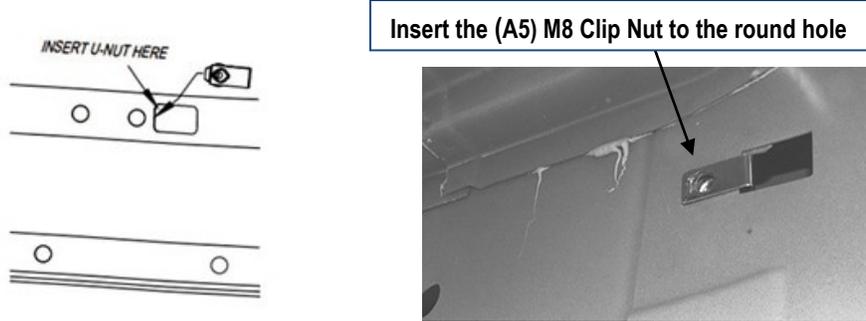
Driver Front/Passenger Rear Mounting Bracket Assembly
